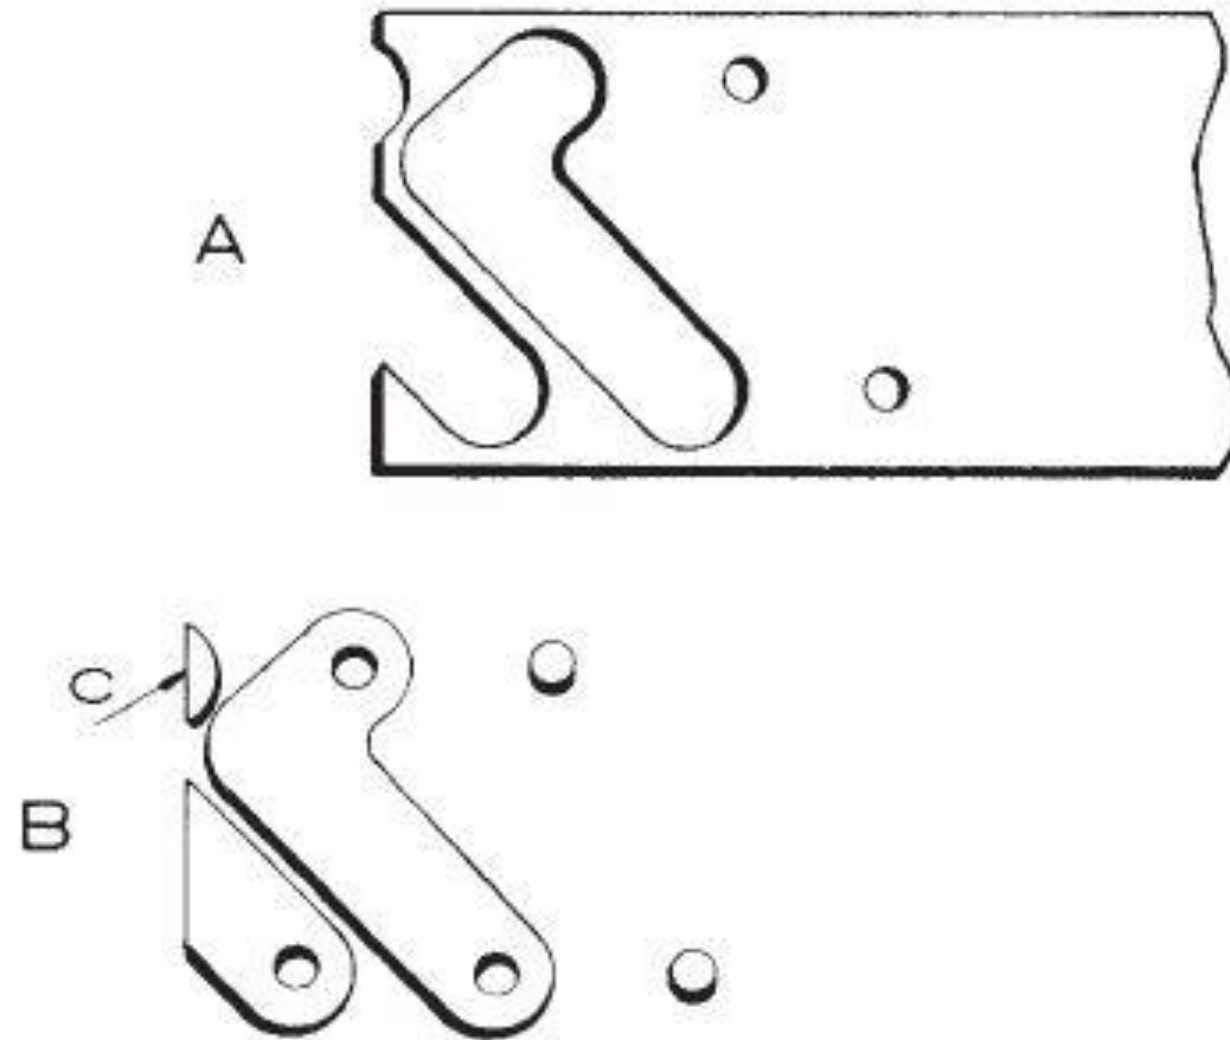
The resulting scrap strip (A) and parts removed (B) in testing the second layout.
